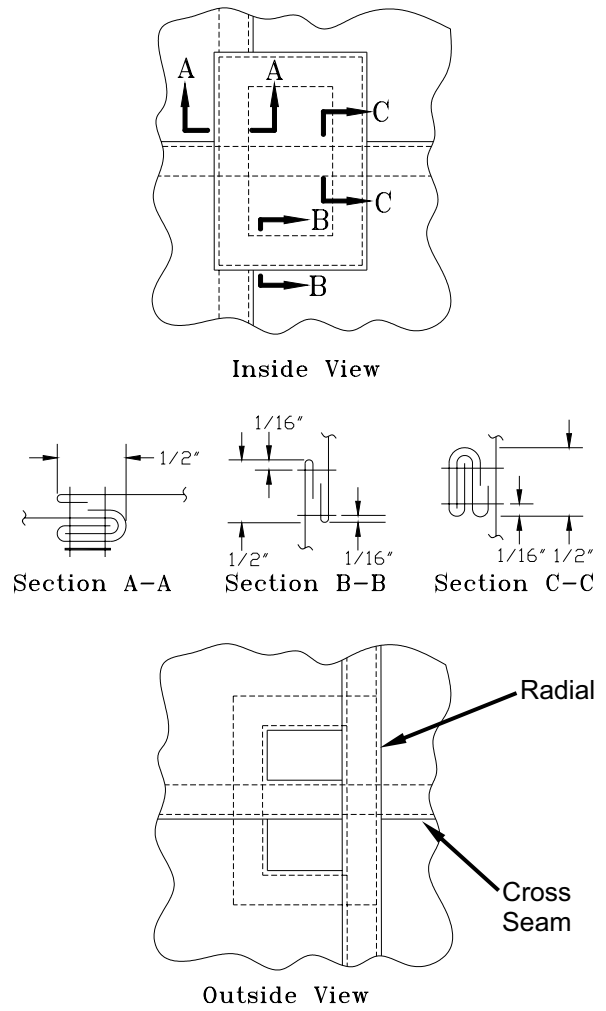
Rectangular Patch Crossing a Cross Seam and Including Radial Seam.
